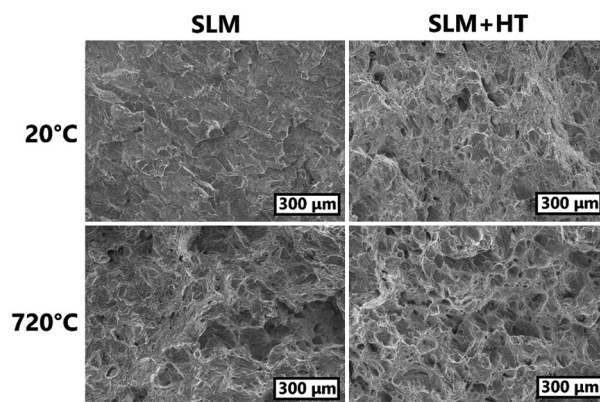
Fracture surfaces of samples after SLM without and with heat treatment after tensile testing at 20°C and 720°C. Magnification: $\times 100$ Abbreviation: SLM: Selective laser melting
